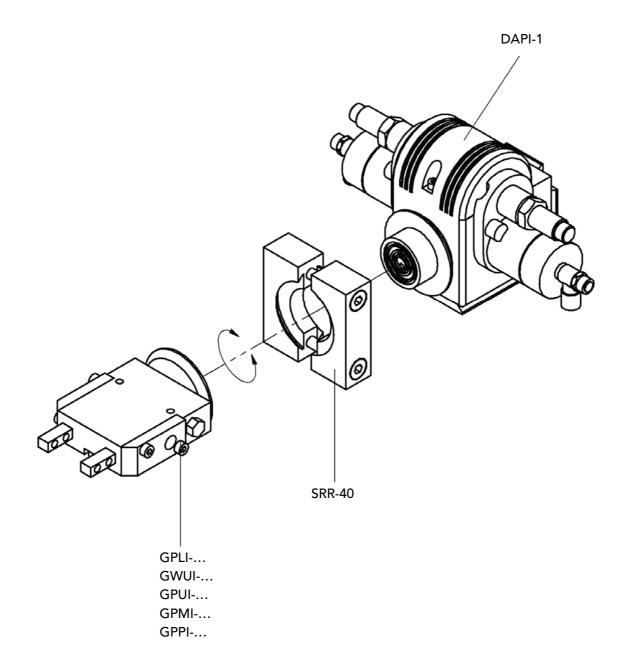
Gripper axis perpendicular to the axis of rotation
